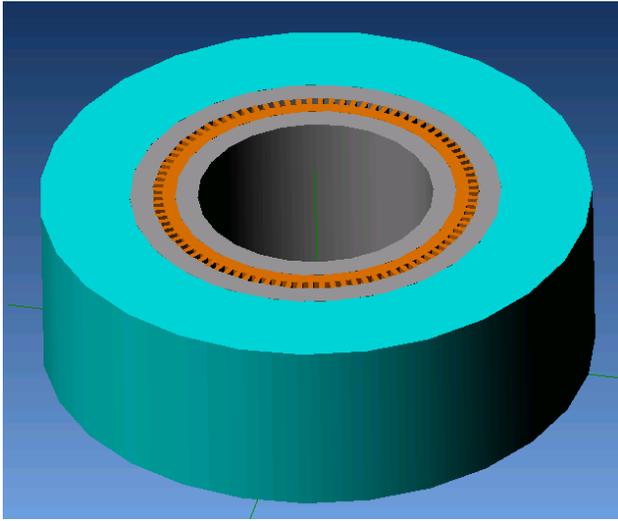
View of brazing assembly fixturing for inner and outer cylinders of ferrite using a suitable keeper ring to prevent the outer ferrite from being in tensile during the brazing process. After cool down, the inner ring is not brazed but held in compression by the extruded copper inner core.
